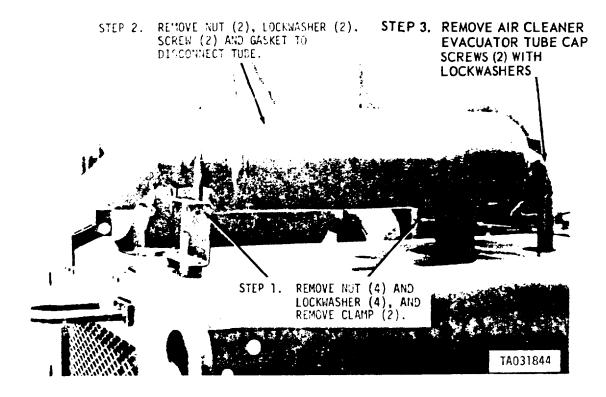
Muffler and exhaust pipe, removal and installation.
